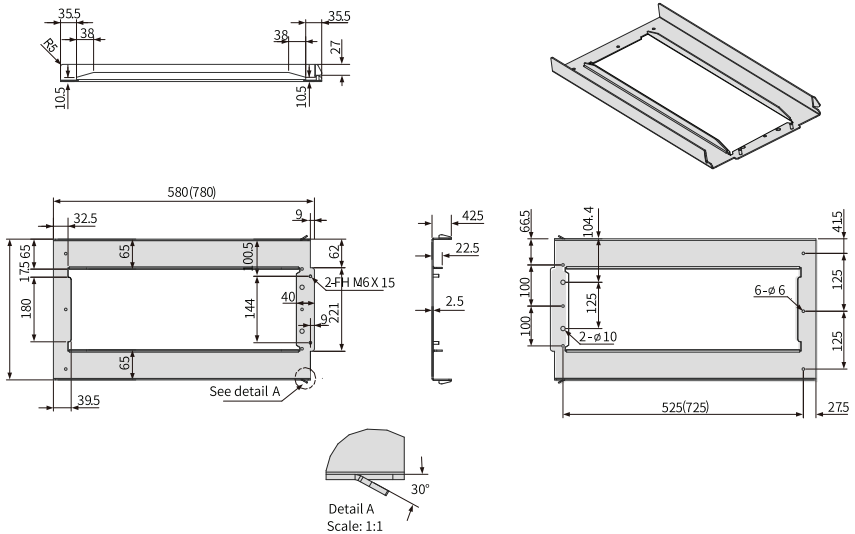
Dimensions of bottom mounting bracket for T12 models (mm)
